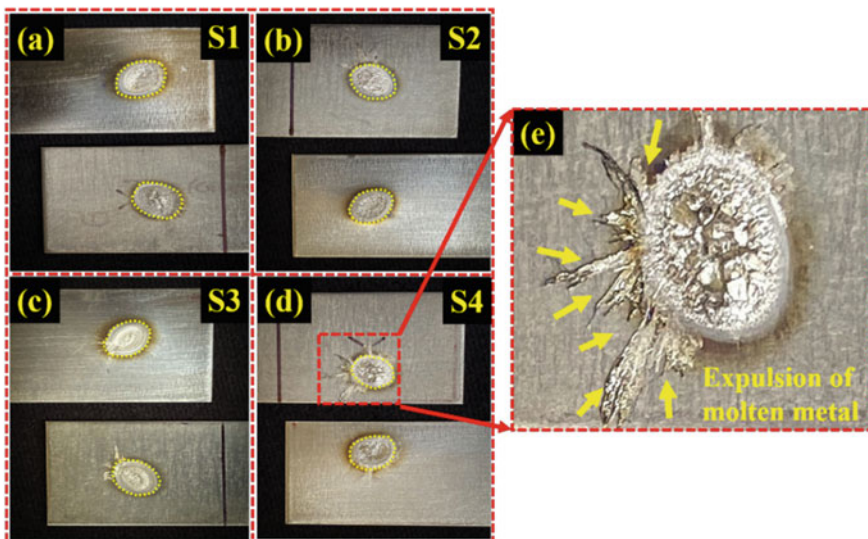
a–d Fracture surface of weldments at different welding conditions, and e molten metal expulsion from the weld nugget for S4 case
